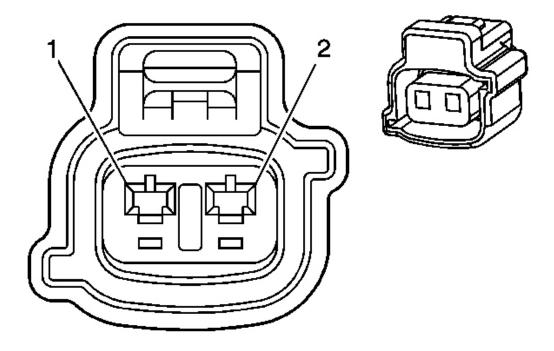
Door Lock Actuator Connector End Views Courtesy of GENERAL MOTORS CORP.
